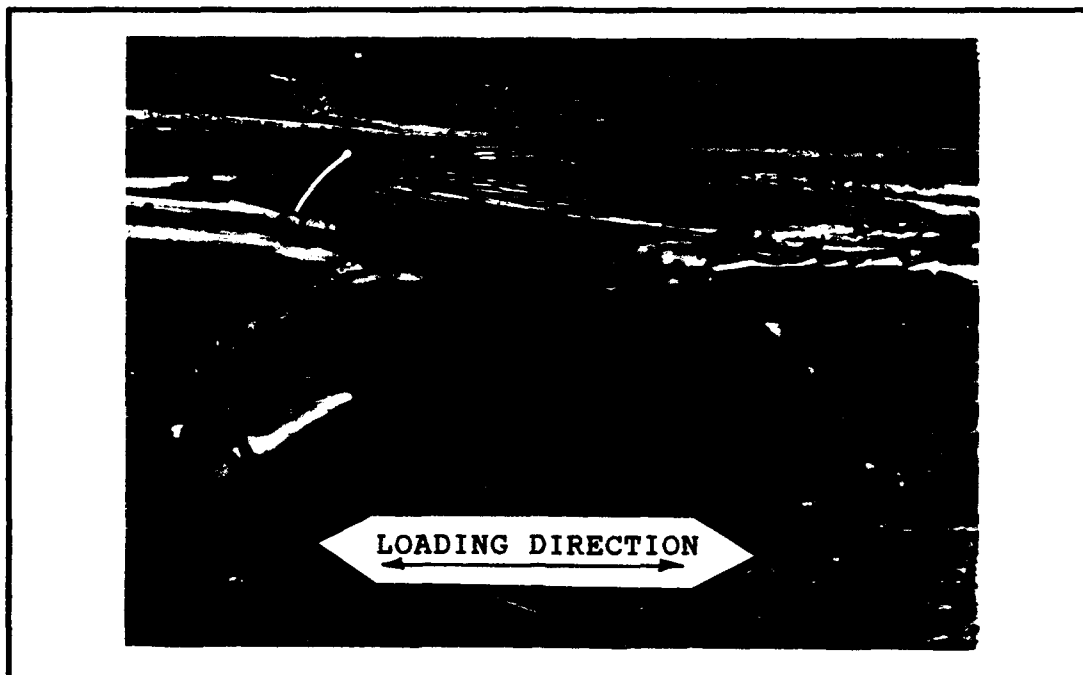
Face Replica of Cracks Emanating from hole on Specimen 93G01000
